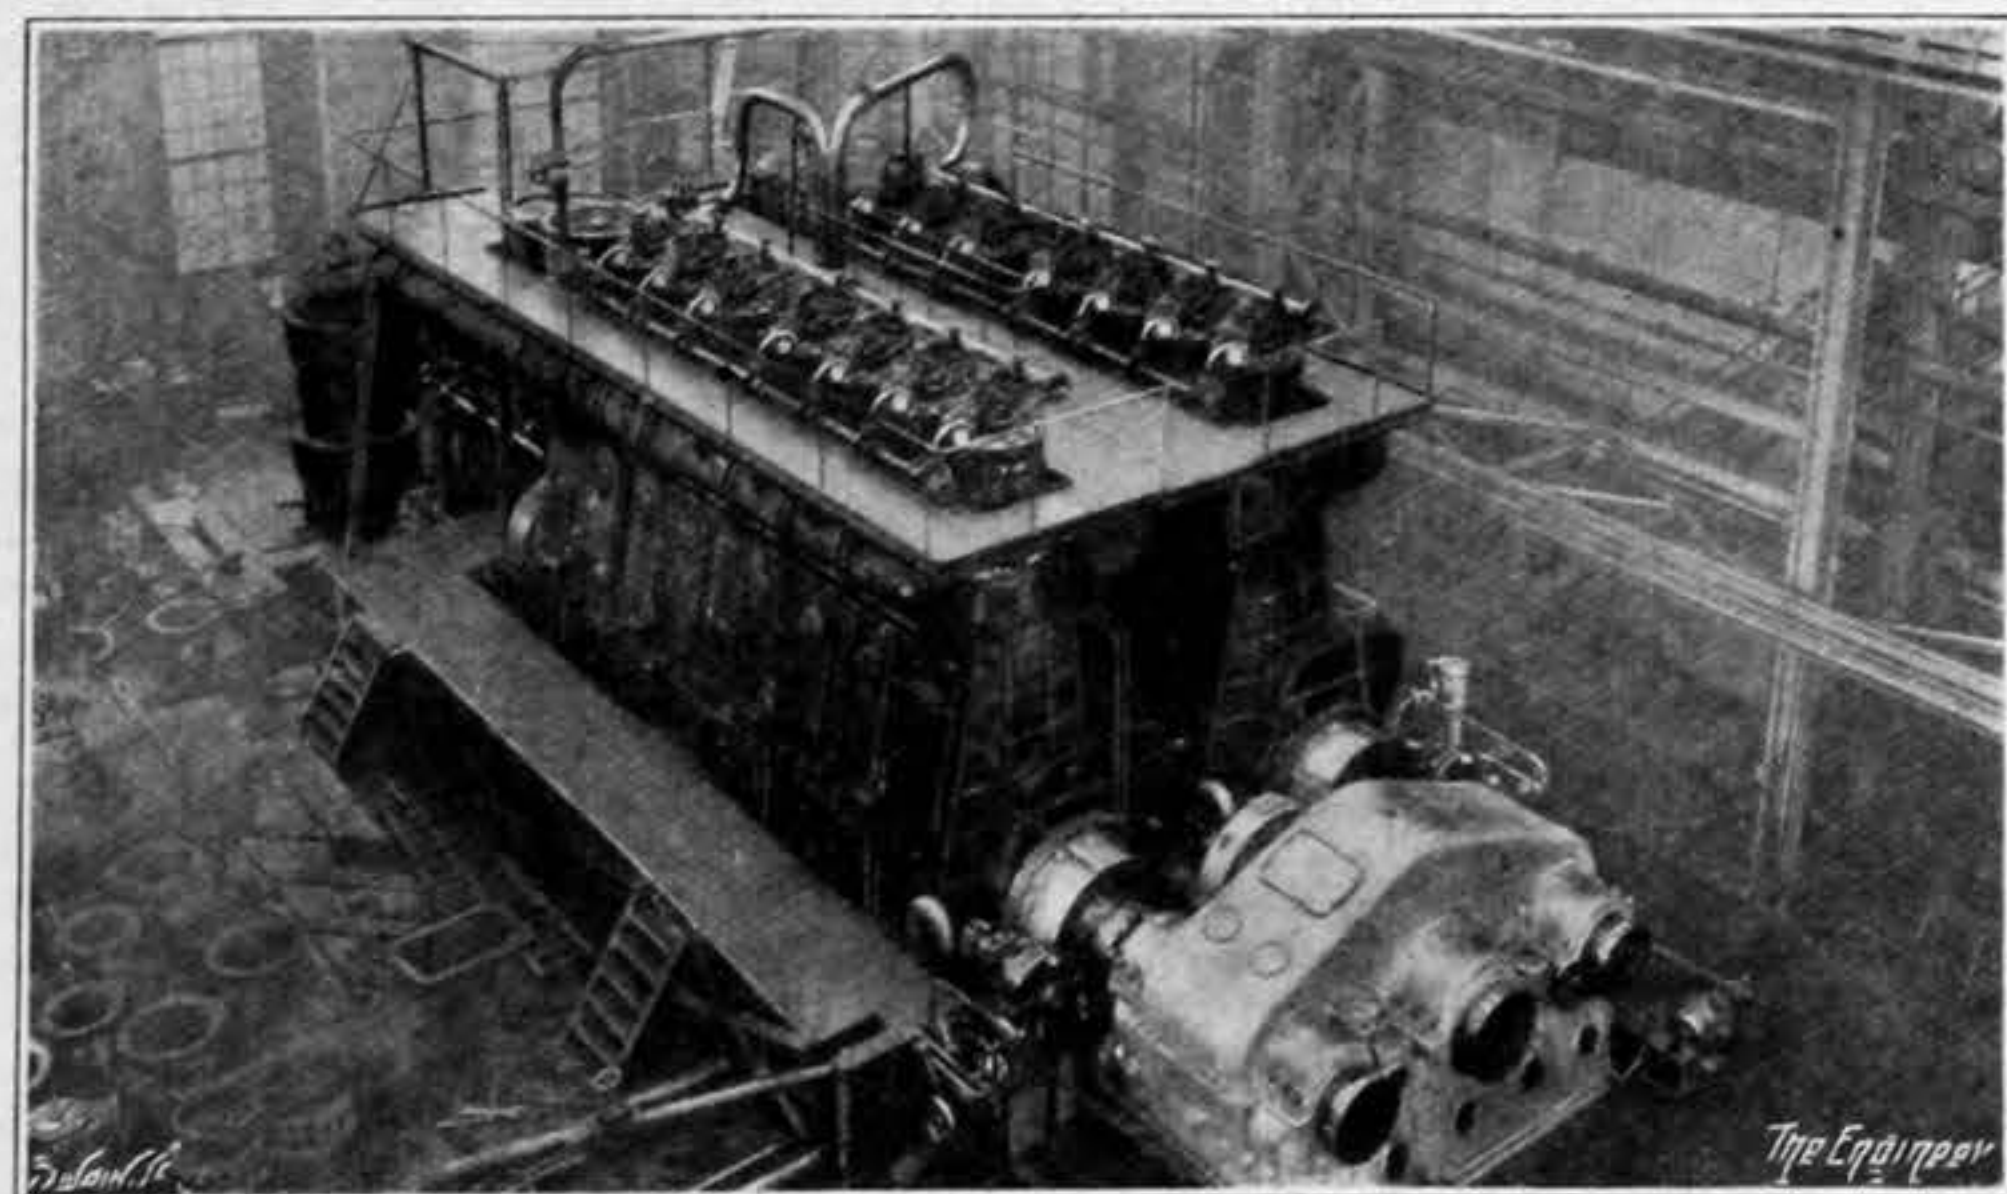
ENGINES AND GEAR DRIVE UNDER TEST
